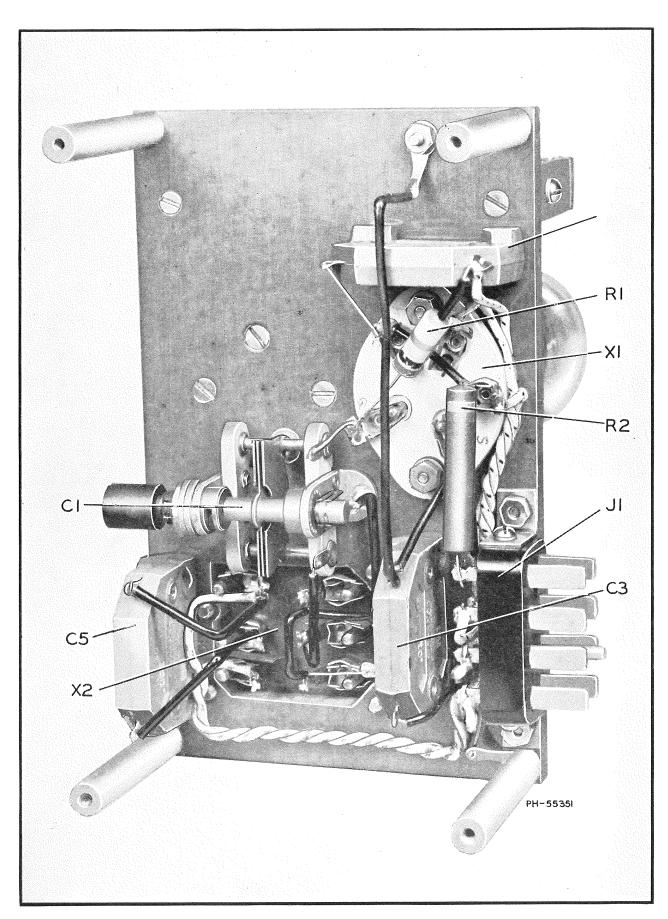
R-F Oscillator Unit (Bottom View, Covers Removed)
